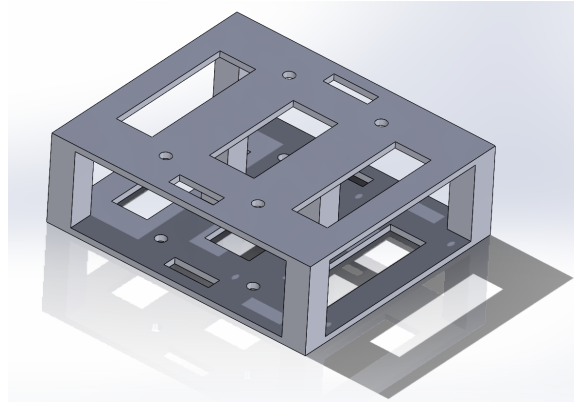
flight control locator board that secures the Pixhawk flight controller.
